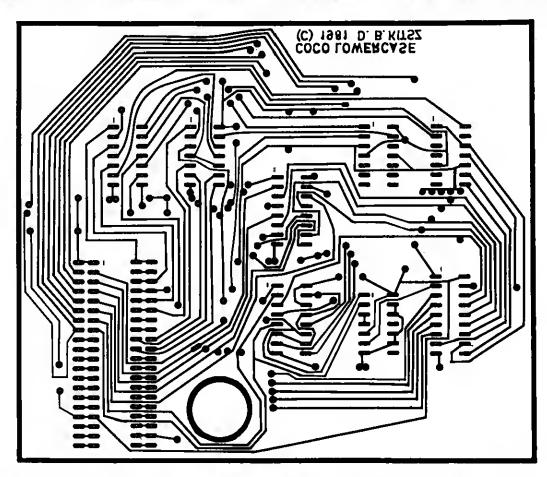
Complete printed circuit board layout for the Color Computer lowercase modification. Post hole must be cut before mounting parts on the board. Note that this is the bottom of the PC board, viewed from above and through the board.
